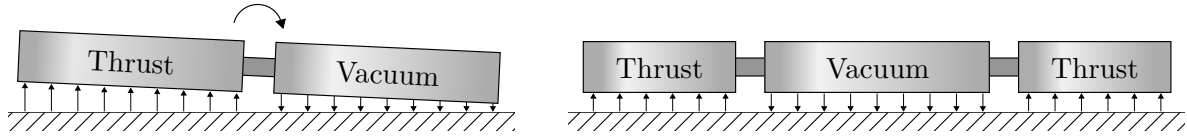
Combining a thrust and vacuum bearing will result in a net torque, causing the combination to tilt. For tip-tilt stability, the vacuum bearing is enclosed with thrust bearings, solving this problem.
